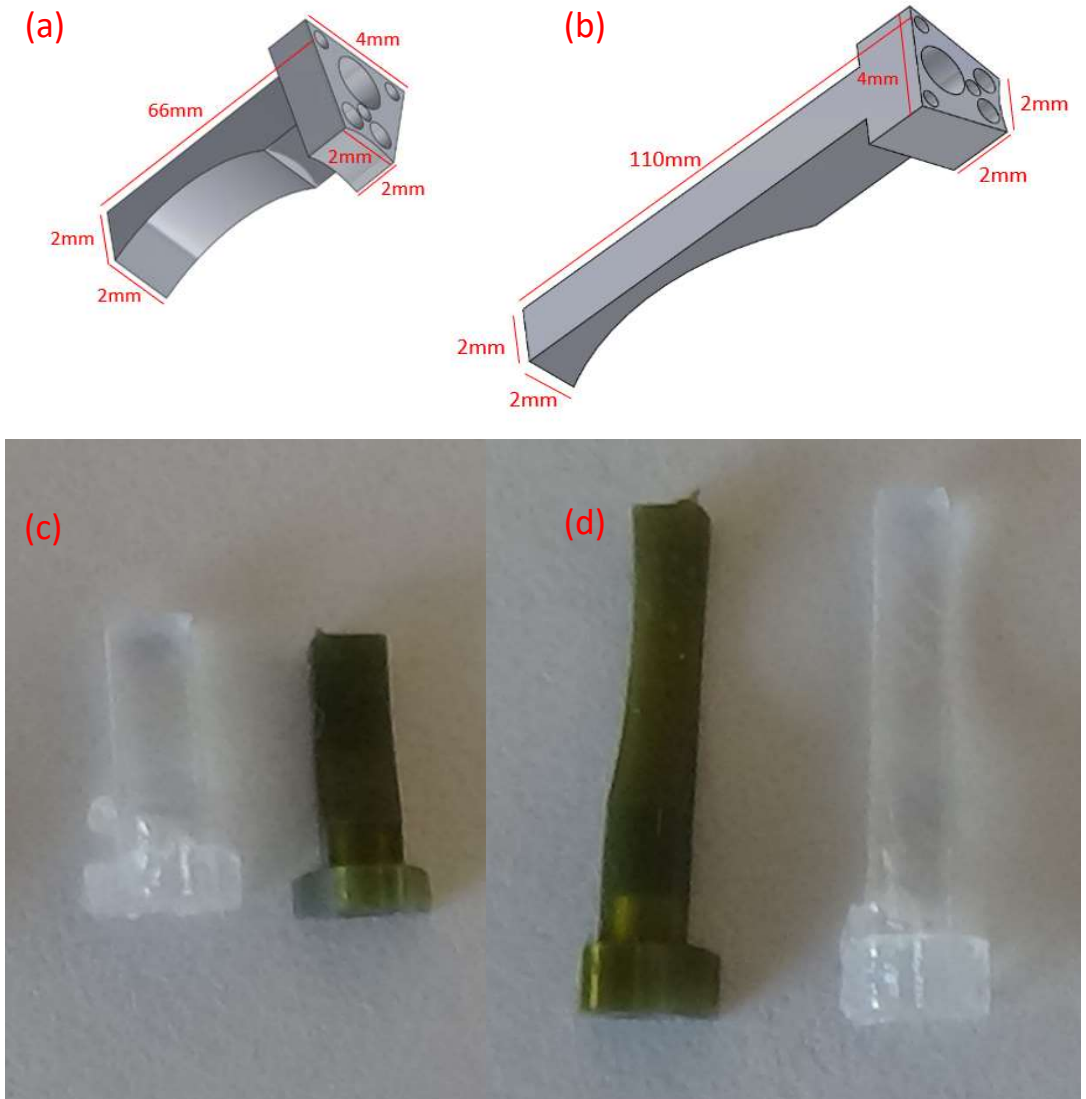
3D design of fingers with Solidworks and the real 3D printed ones. (a) Short finger schematic design and its dimensions. (b) Long finger schematic design and its dimensions. (c) 3D printed short fingers printed by Form-2 3D printer developed by Formlabs. (d) 3D printed long fingers printed by Form-2 3D printer developed by Formlabs.
